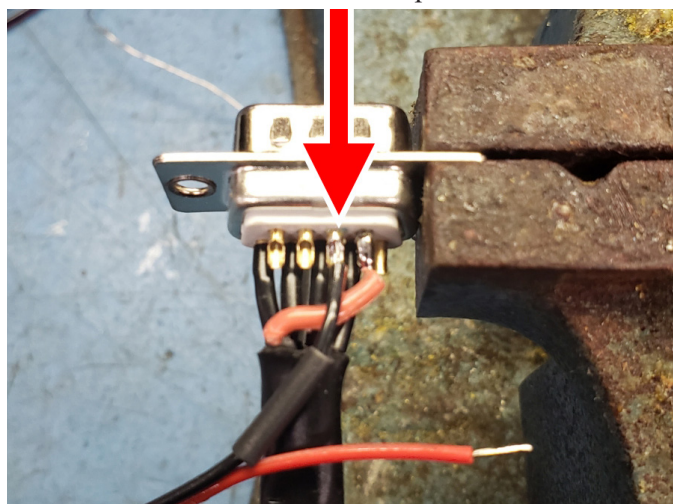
The DB9 connector is held in a clamp. The red arrow points to the #8 pin.
